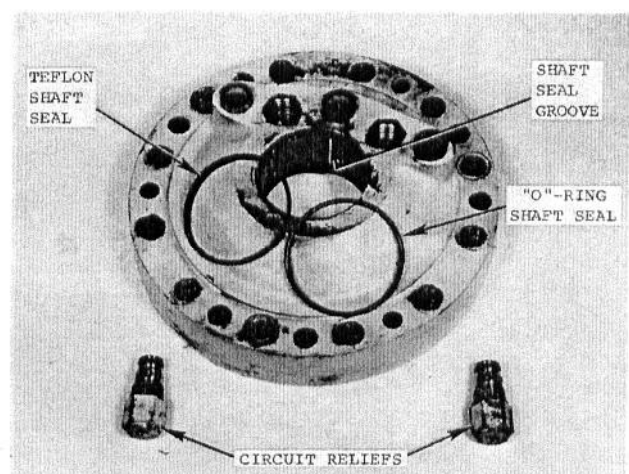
Circuit Reliefs and Shaft Seals Removed From Top Cover
